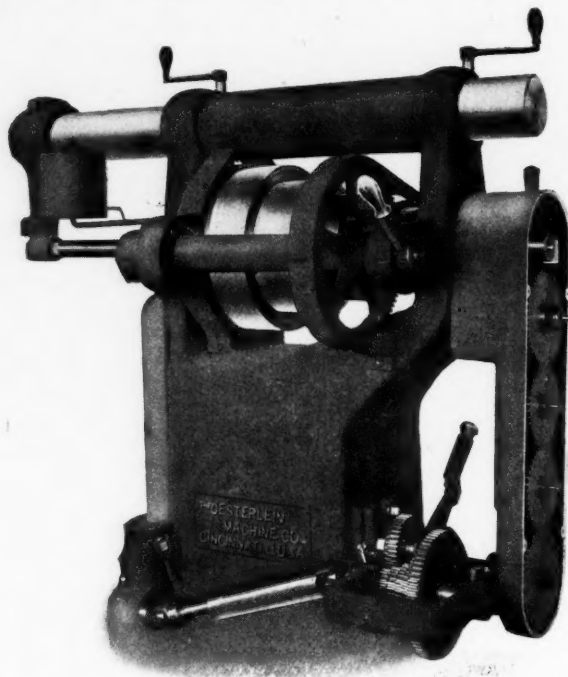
Spur Gear Feed Mechanism of Oesterlein Milling Machine.
